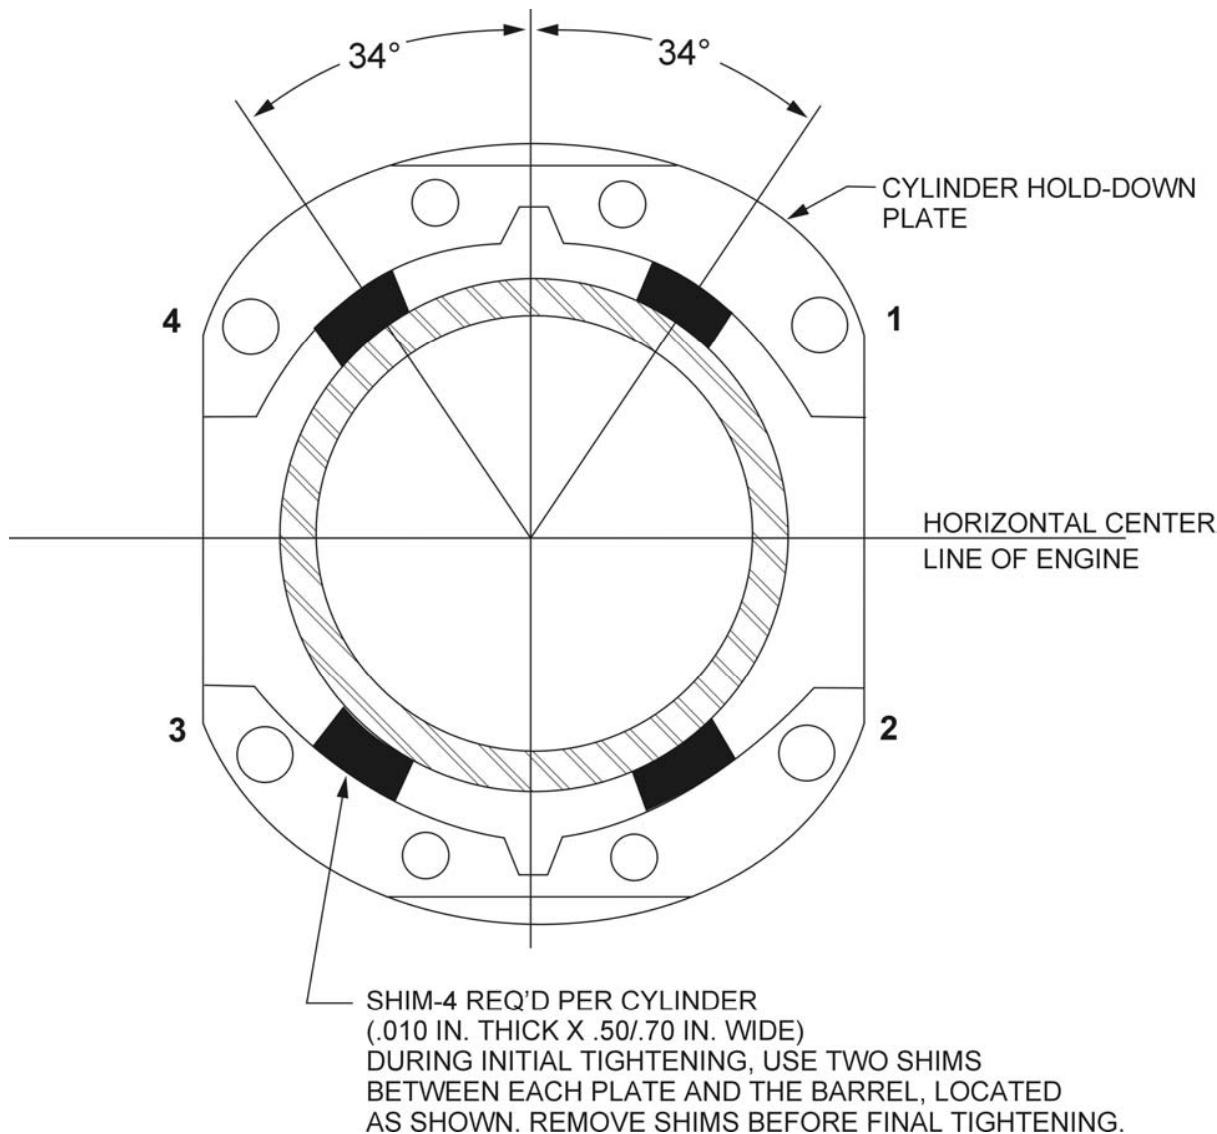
Location of Shims Between Cylinder Barrel and Hold-Down Plates (where applicable) and Sequence of Tightening Cylinder Base Hold-Down Nuts
